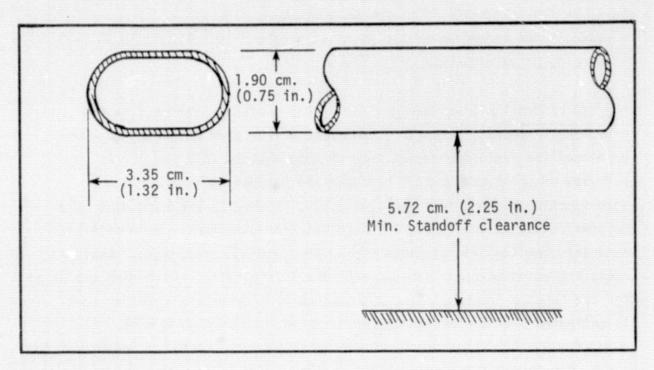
EVA Handrail Grip (Cross-section) Dimensions
